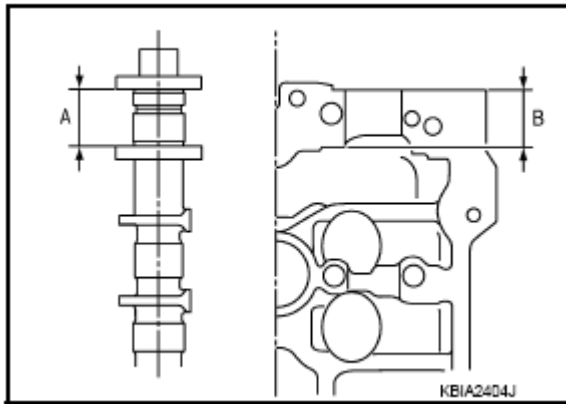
Identifying Camshaft No. 1 Journal And Cylinder Head No. 1 Journal Bearing
